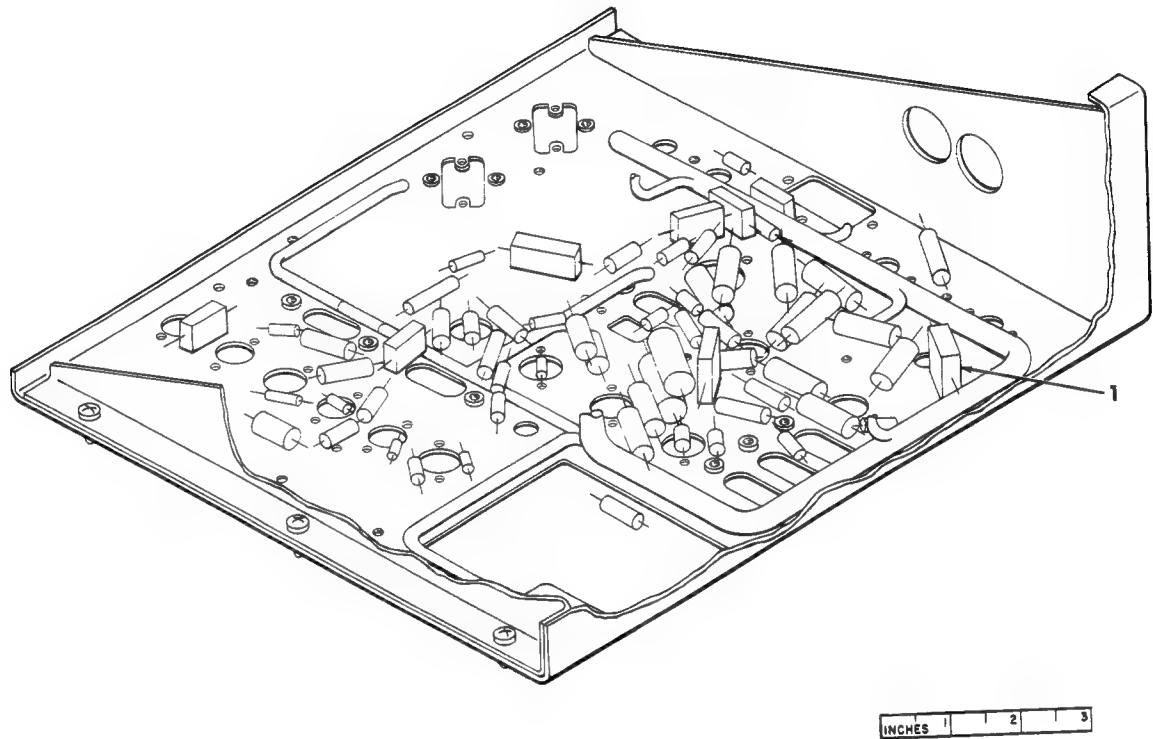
Oscilloscope OS-49/M (8007722)—partial exploded view
